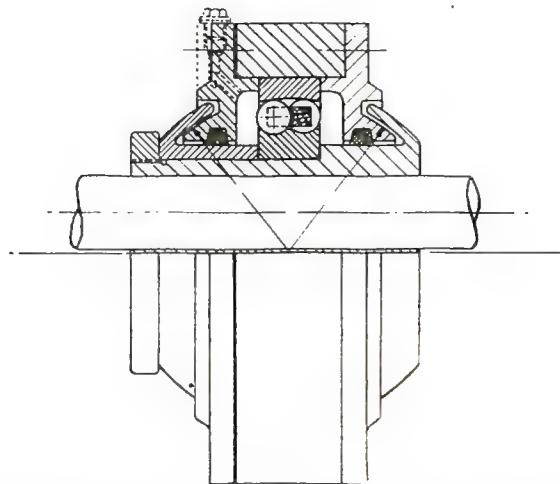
Method of Protecting Plummer Block Bearing with Sheet Metal Shroud.
